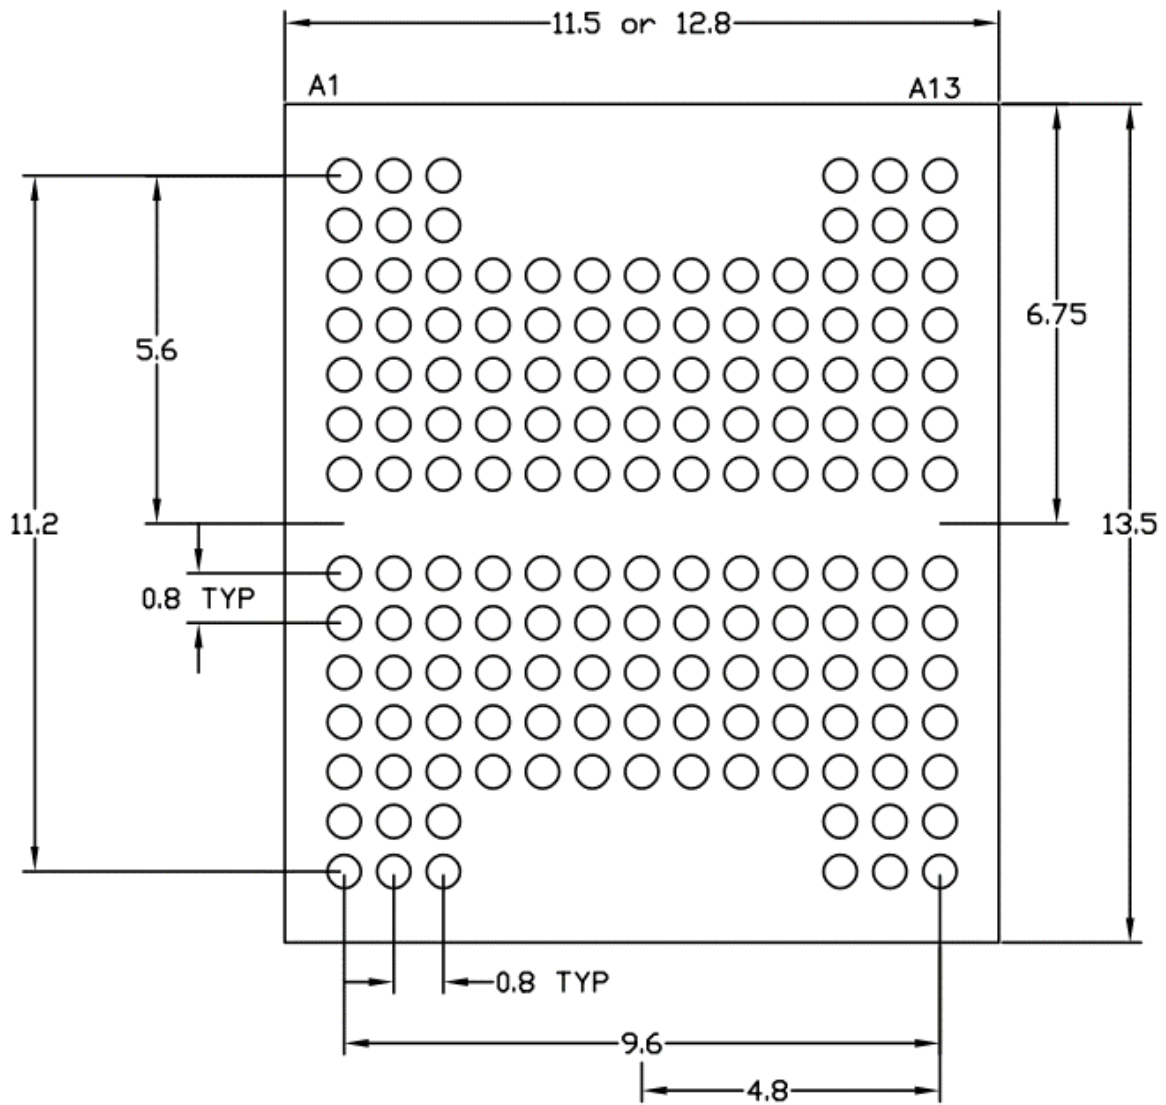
BGA-154 ball spacing requirements (top view, dimensions in millimeters)
